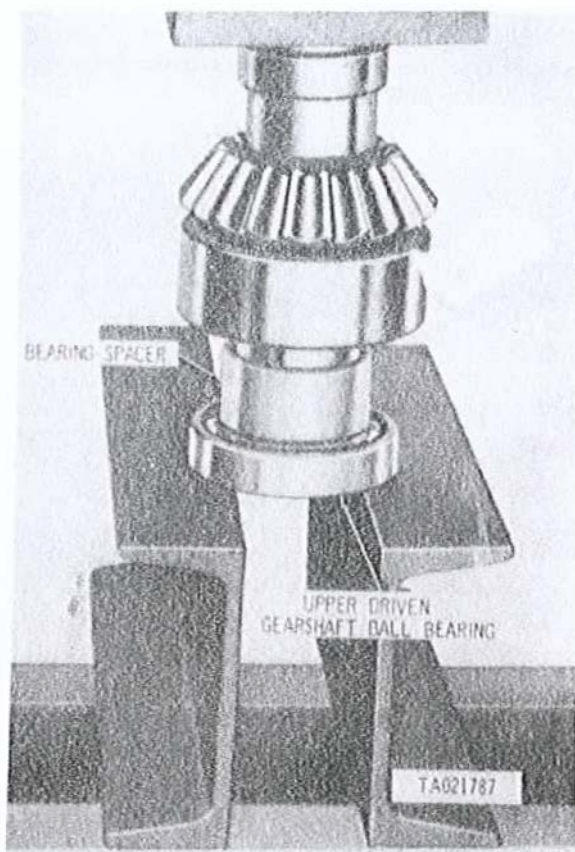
Pressing fan driven gearshaft into upper gearshaft ball bearing.
